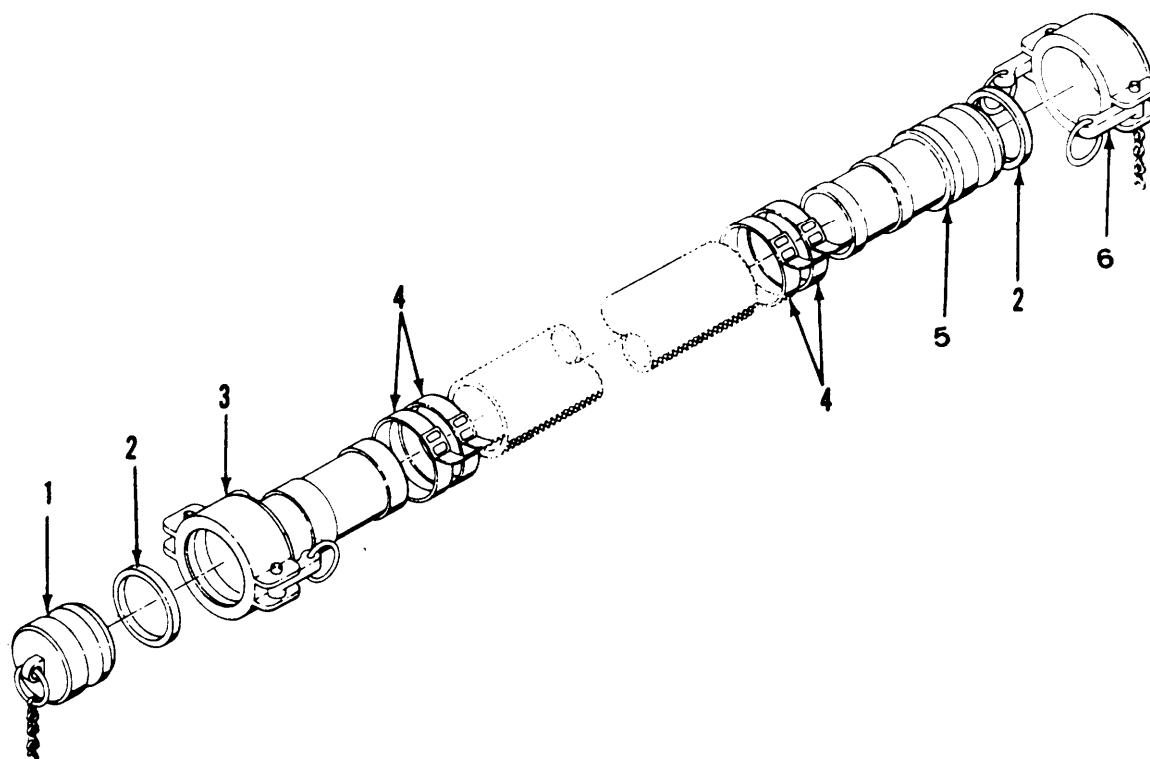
Discharge Hose Assembly, 3 In. X 50 Ft.
